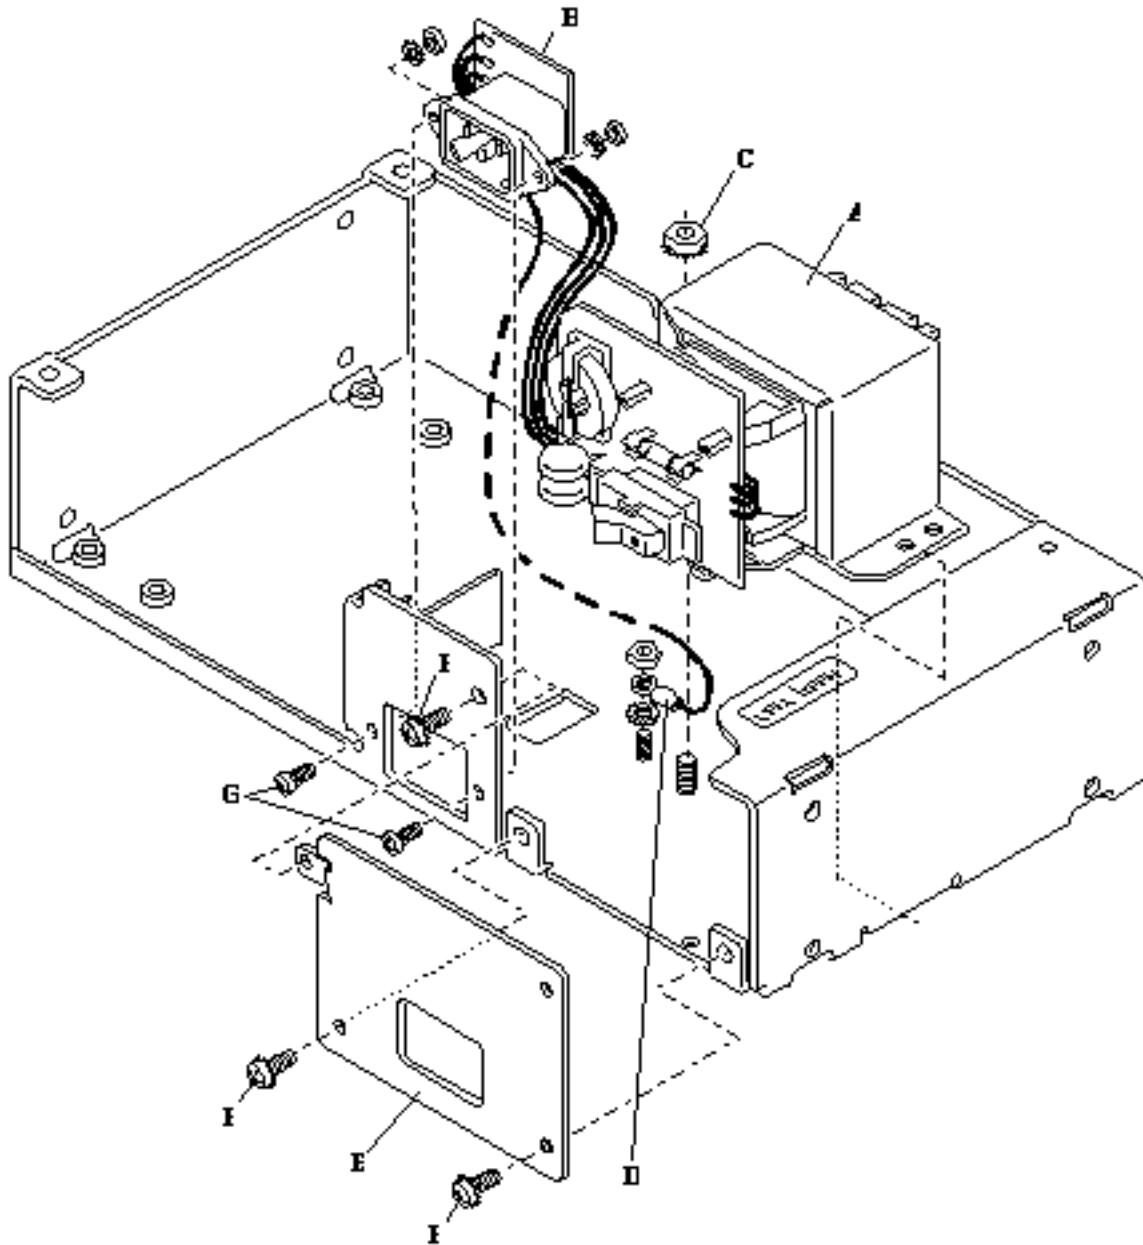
AC Switch Assembly and Power Transformer (1 of 2)
